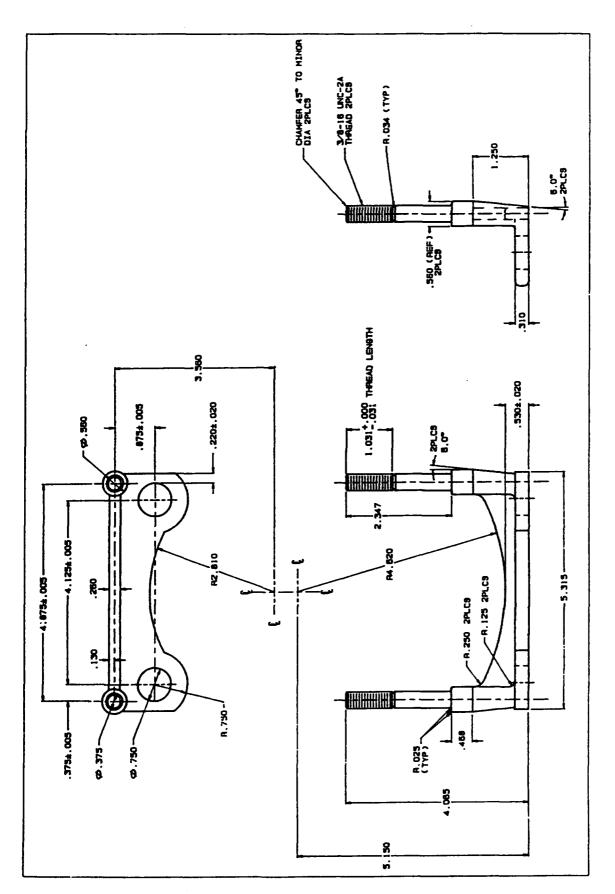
Unmodified TR-317 standard bracket design drawing
